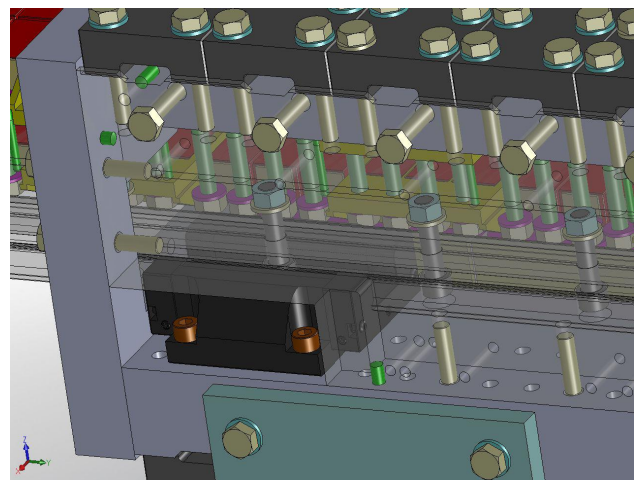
Recirculating ball bearings used in the electromagnetic actuator prototype.
